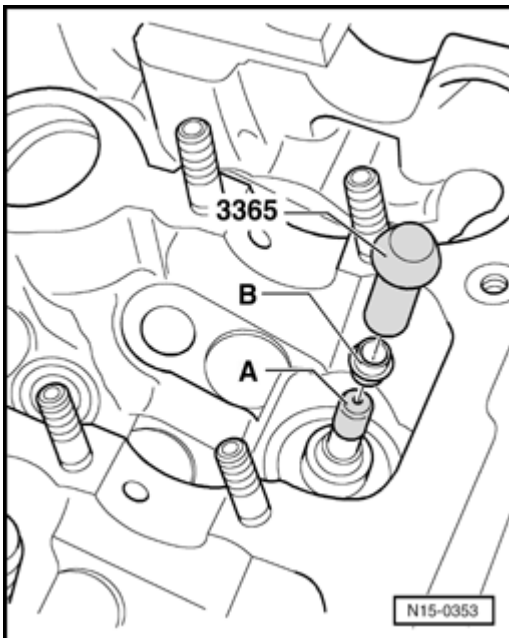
Plastic Sleeve, Valve Stem Seal And Valve Stem Seal Driver 3365
